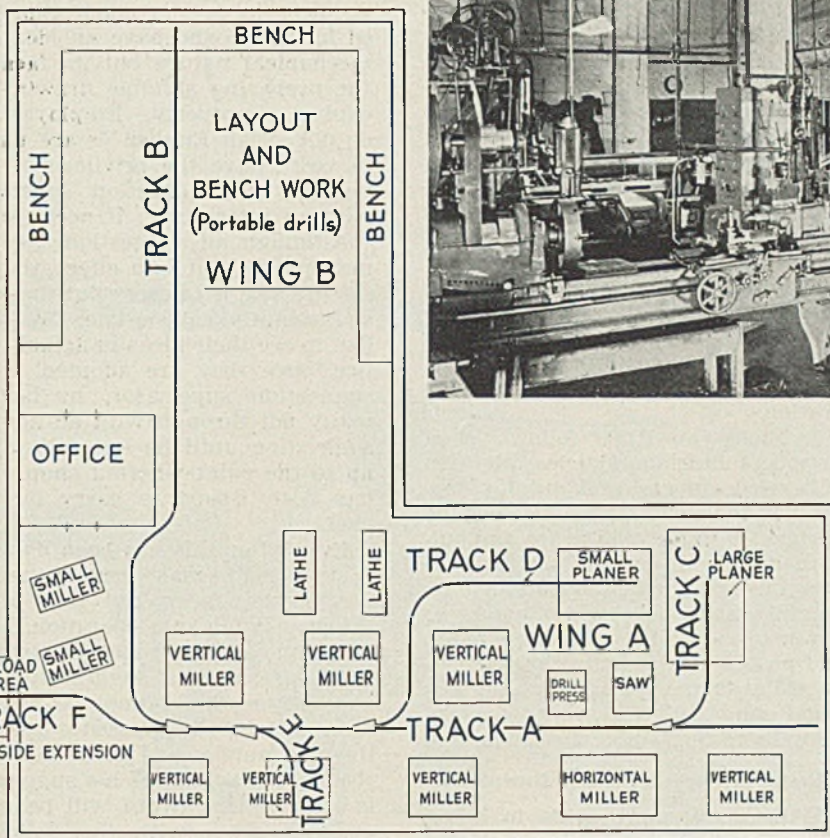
Floor plan diagram of Frindt Mfg. Co. plant
